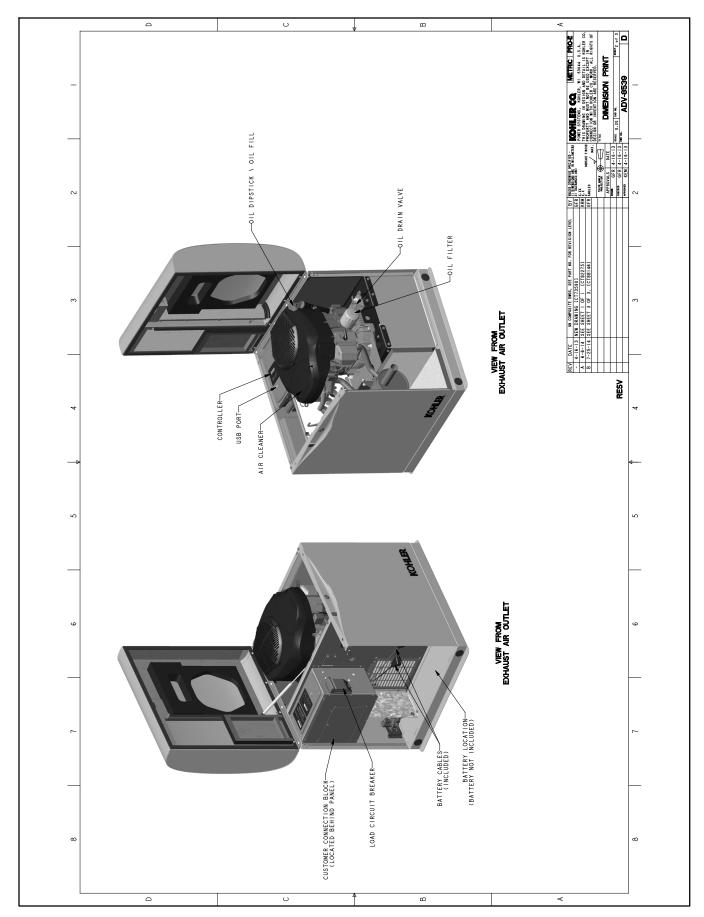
Dimension Drawing ADV-8539, Sheet 2 (for specification numbers GM88347-GA6 or lower)
